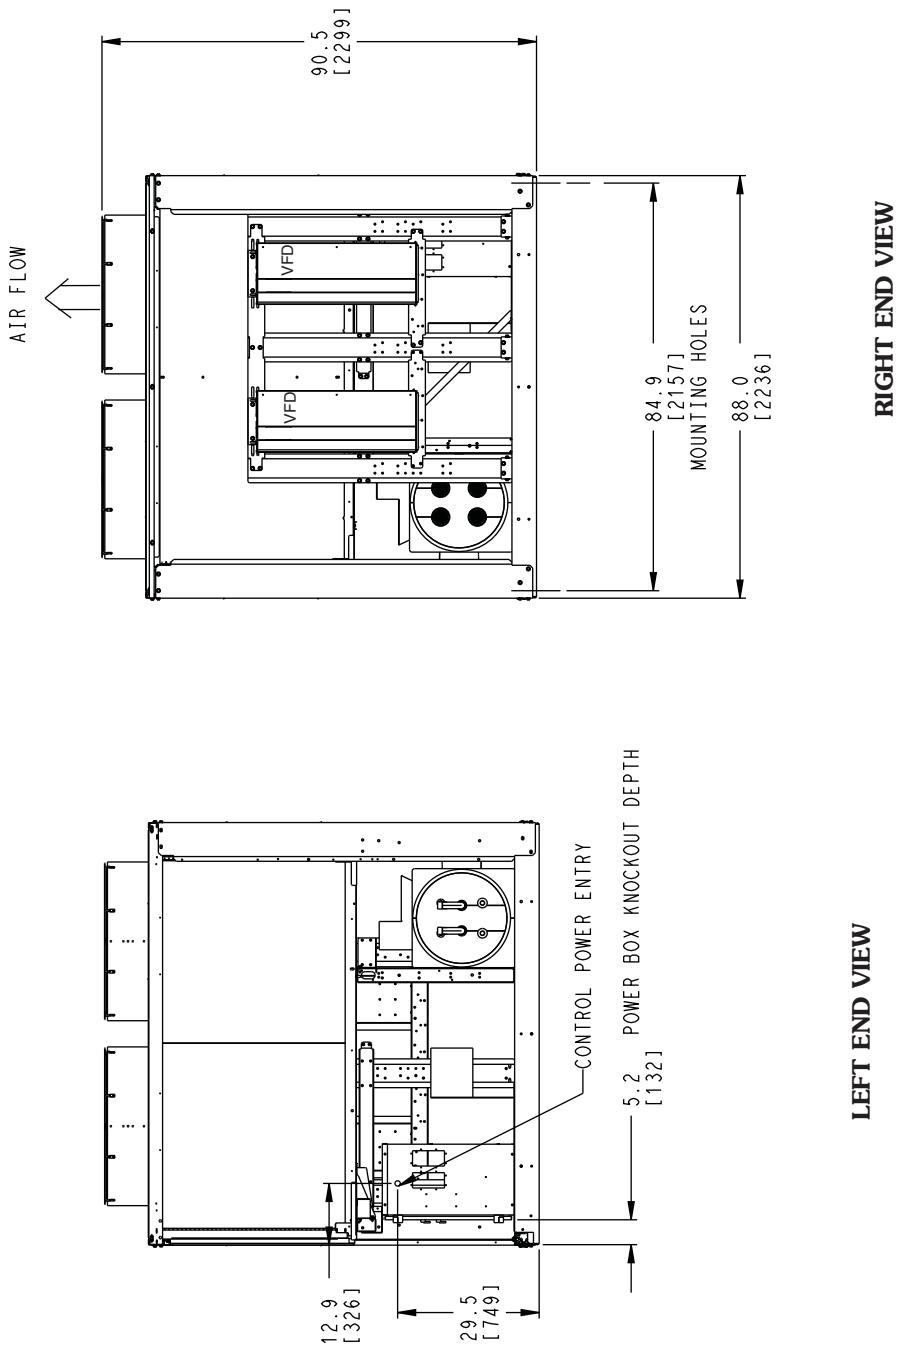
30XA182,202 Air-Cooled Liquid Chiller Dimensions (DX Cooler) (cont)
